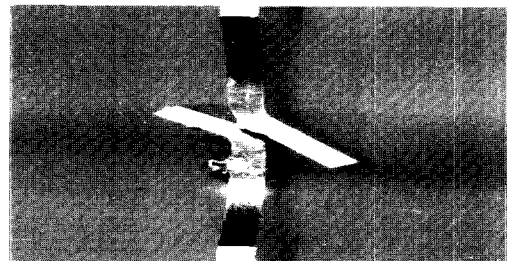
Fracture appearance of the tensile test specimen Butt jointed by FSW⁸⁾
